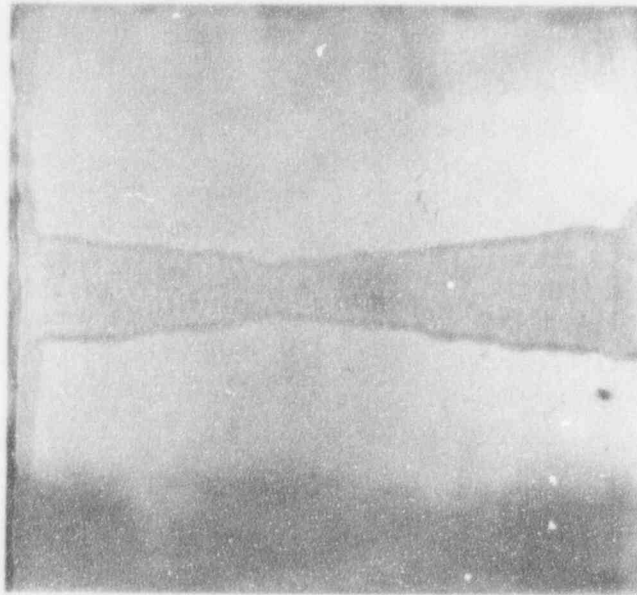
Macrograph of Midland beltline weld section 1-13.
